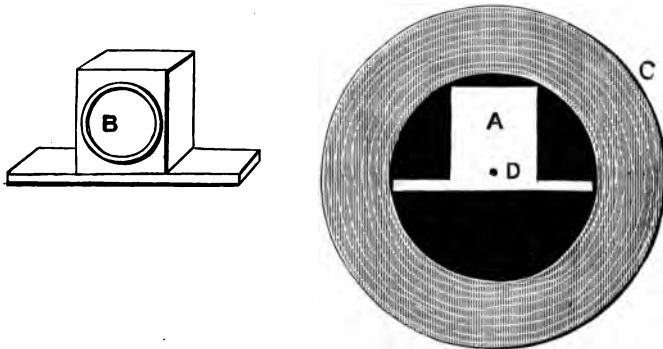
STEAM BLOCK : ORDINARY FORM AND MOUNTED IN CHUCK.
